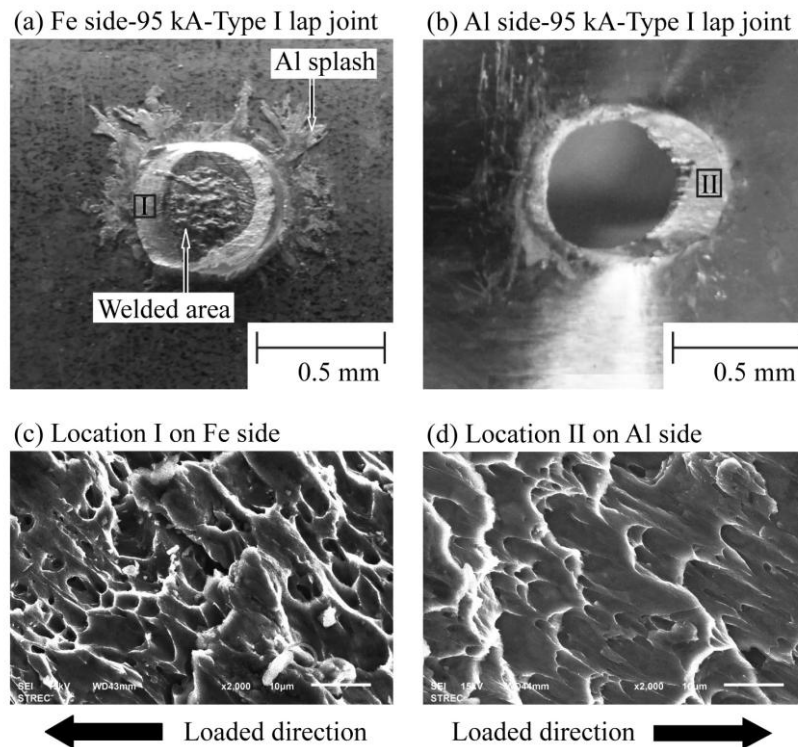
Fracture surface of the Type I specimen that was welded by 95 kA.
